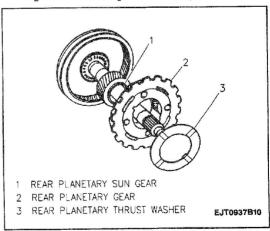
Removing Rear Planetary Thrust Washer, Gear and Sun Gear
